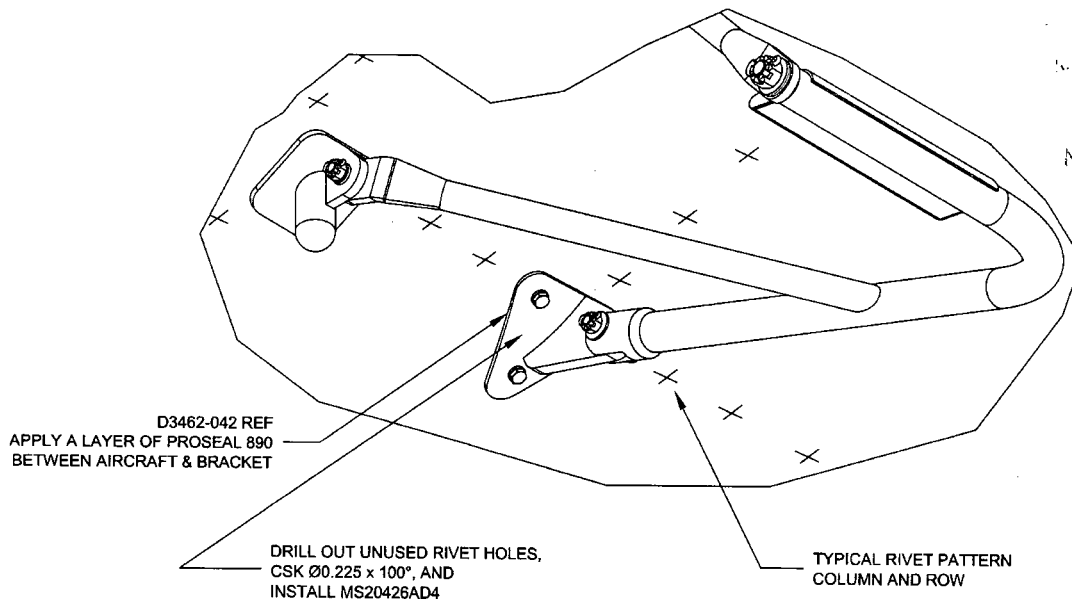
Detail View D3462-042 Bracket Assembly (-032 Installation, Shown) D3462-041, (-031 Installation Opposite)
